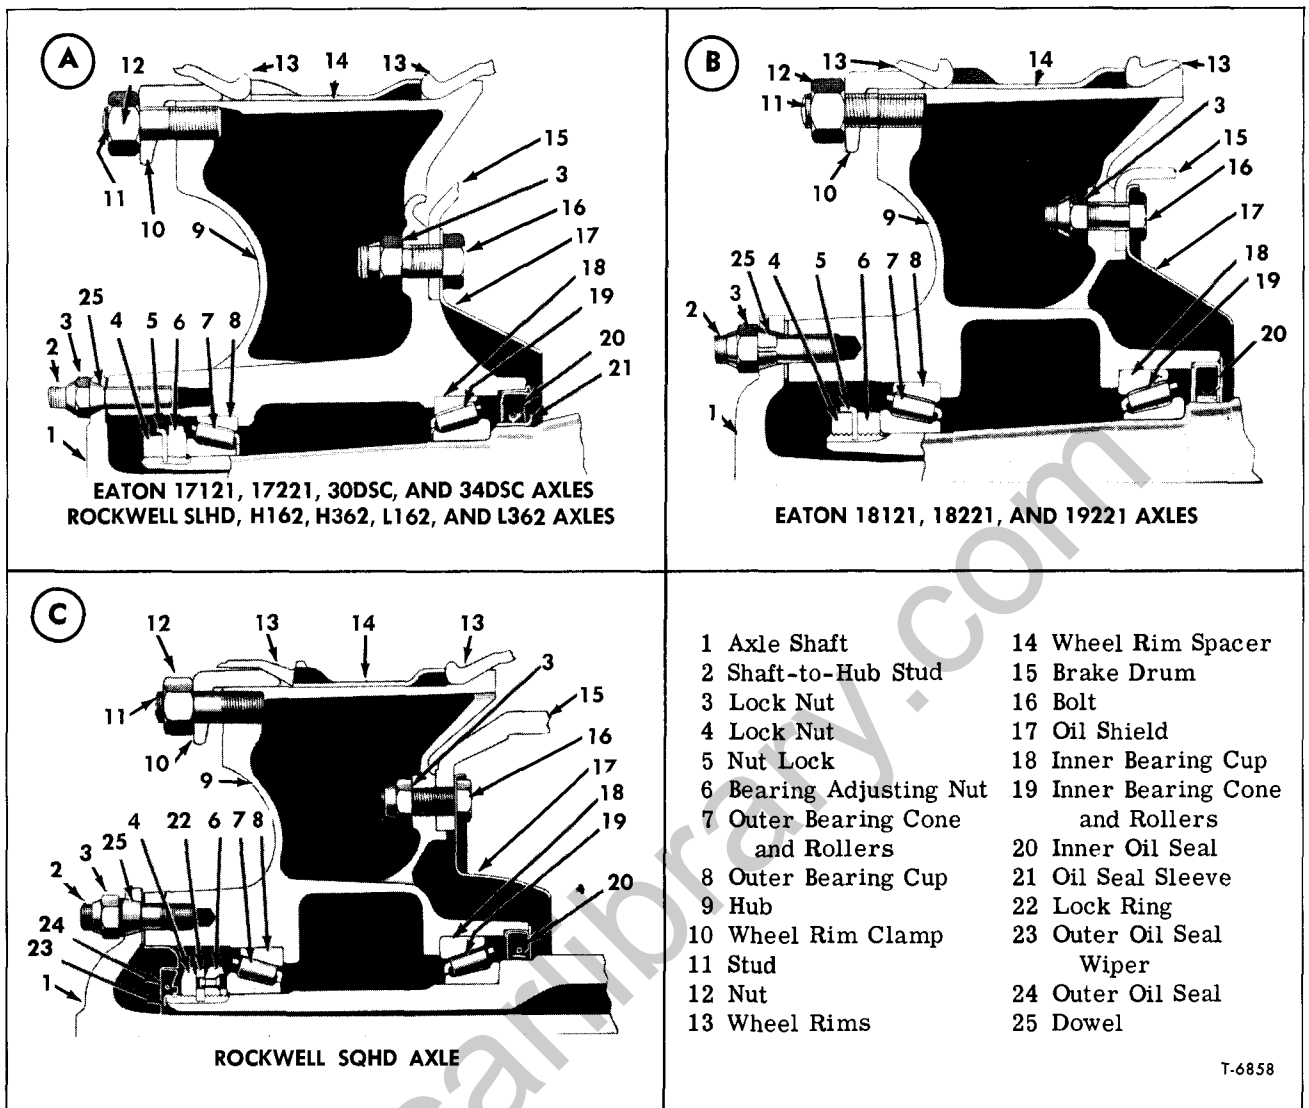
Rear Hubs and Bearings (with Cast-Type Wheels)
